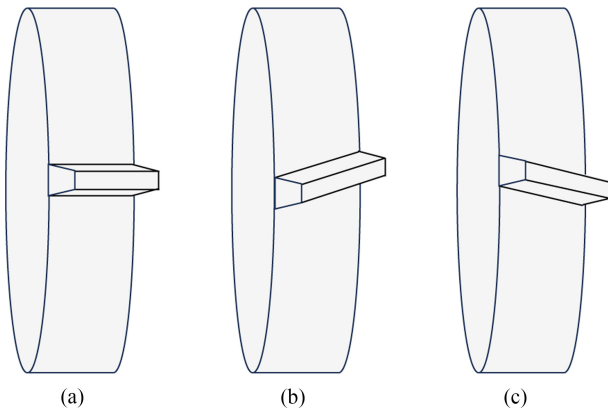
(a) Spur gear, (b) left, and (c) right hand helical gears
